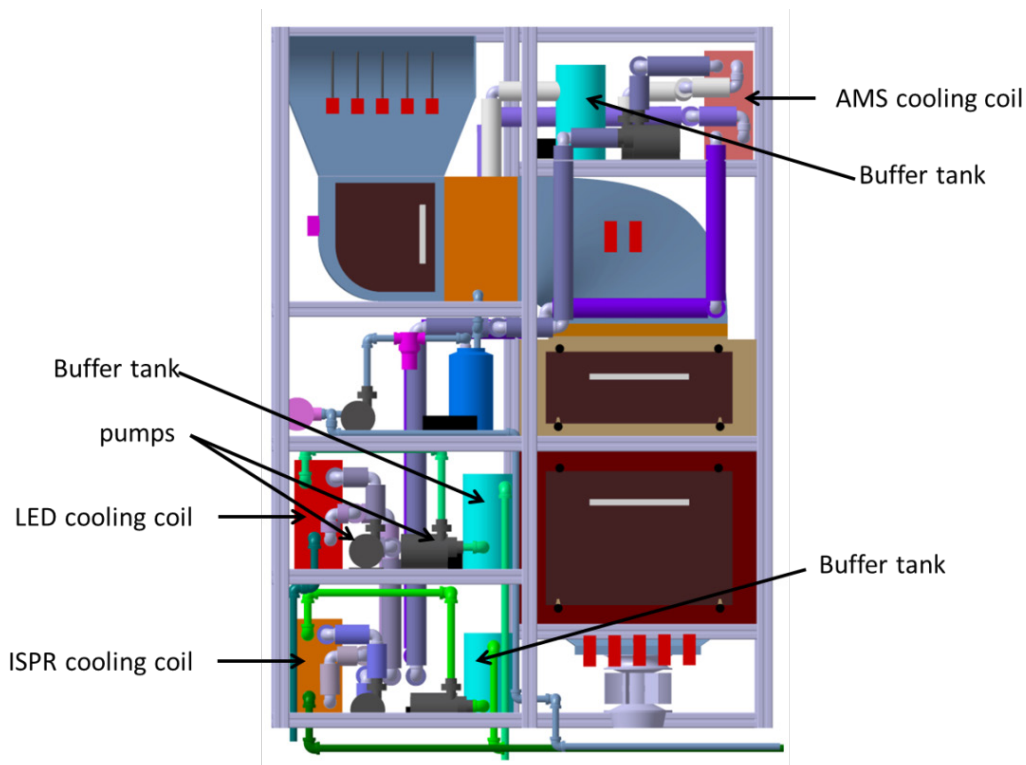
Position of cooling coils, pipes and buffer tanks.
